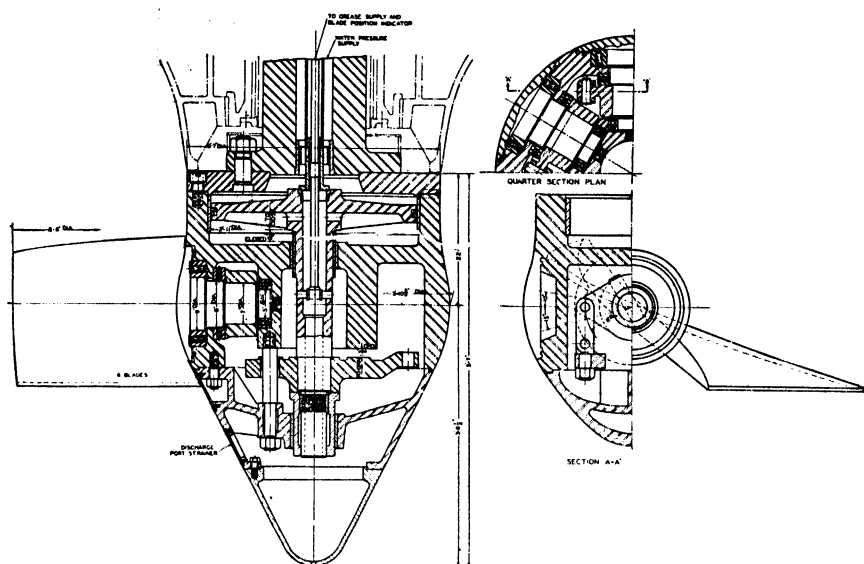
Runner section of Terry turbine for Austin Dam plant, showing hydraulic balancing cylinder and mechanism for automatic blade adjustment. (*Newport News Shipbuilding and Dry Dock Co.*)
